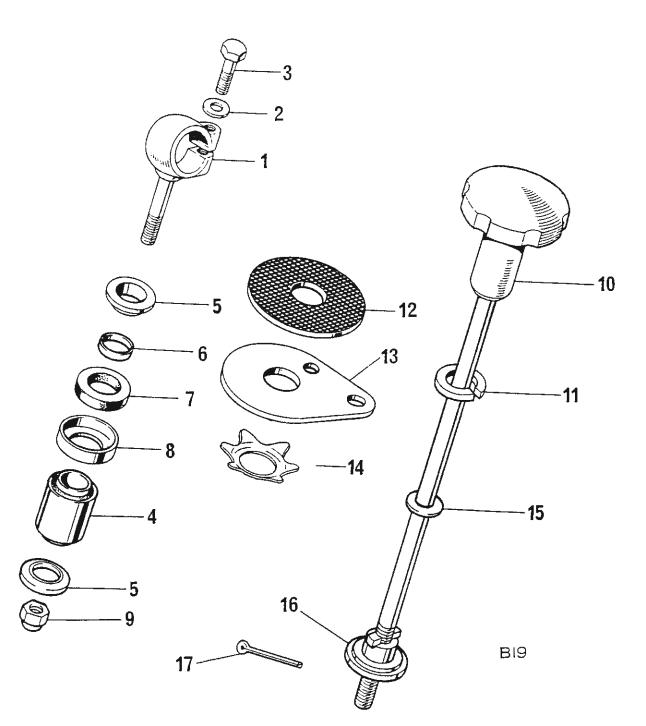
HANDLEBAR MOUNTINGS AND STEERING DAMPER
